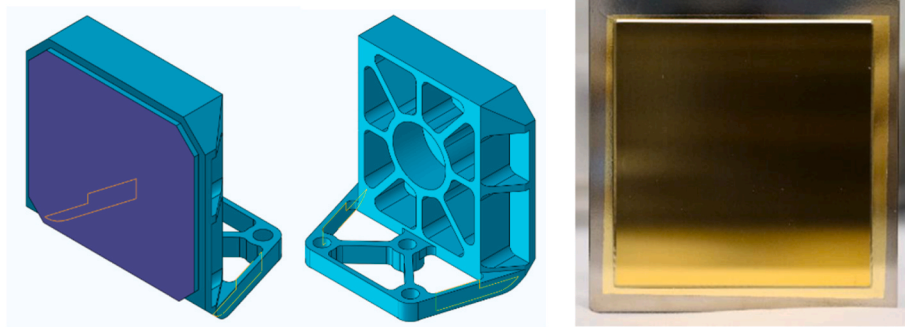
Preliminary 3D drawing (left) and reduced-scale prototype (right) of the grating.
